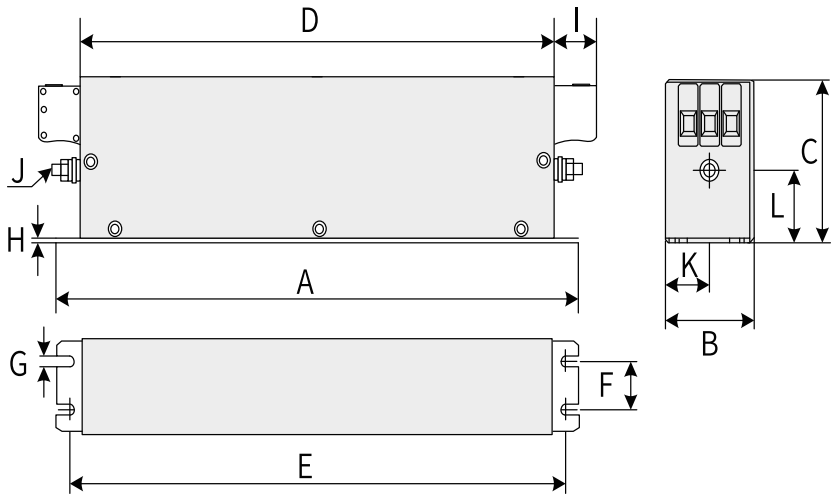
Dimension drawing of FN 3258 series filters (7 A to 180 A)
